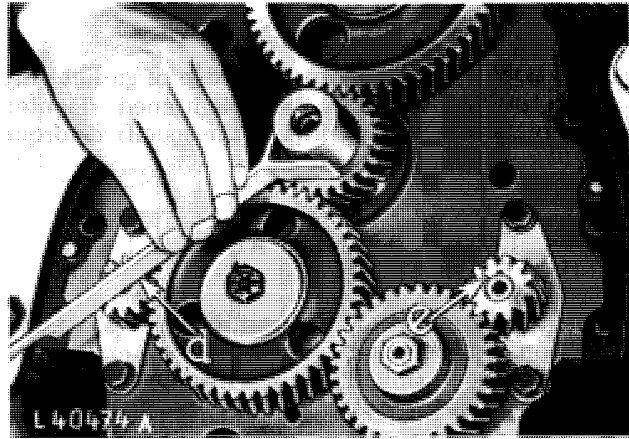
Timing Balancer Shaft Gear by means of Timing Tool No. JD 254
